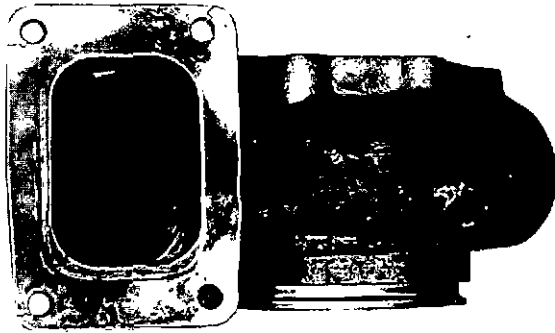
, (TA19). Cracks in the turbine housing mounting flange
